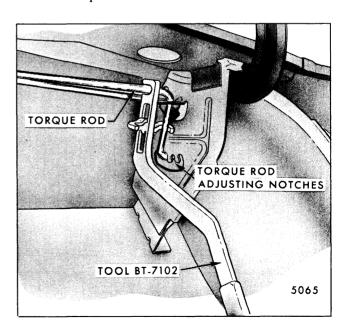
Rear Compartment Torque Rod Adjustment - Oldsmobile "E" Styles
